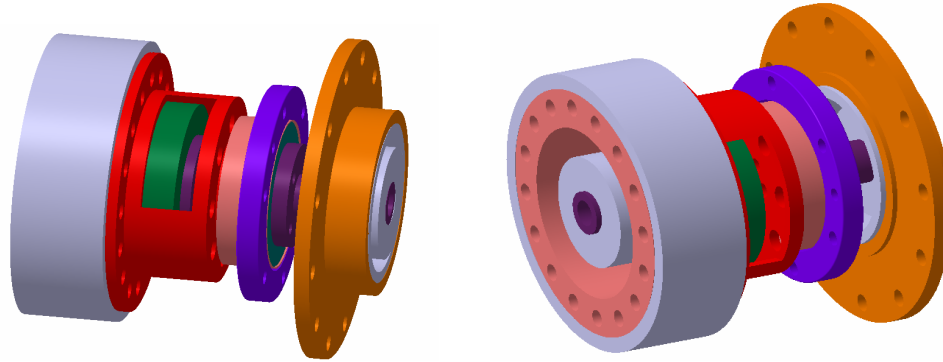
Cross-sectional View of the Motor Wheel Assembly
